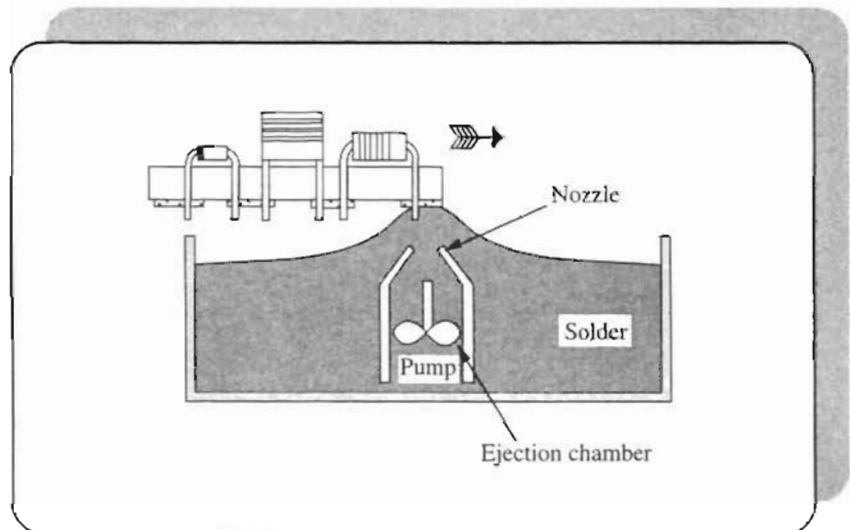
Basic principle of wave soldering, in which molten solder is pumped up and out of an ejection chamber and nozzle
